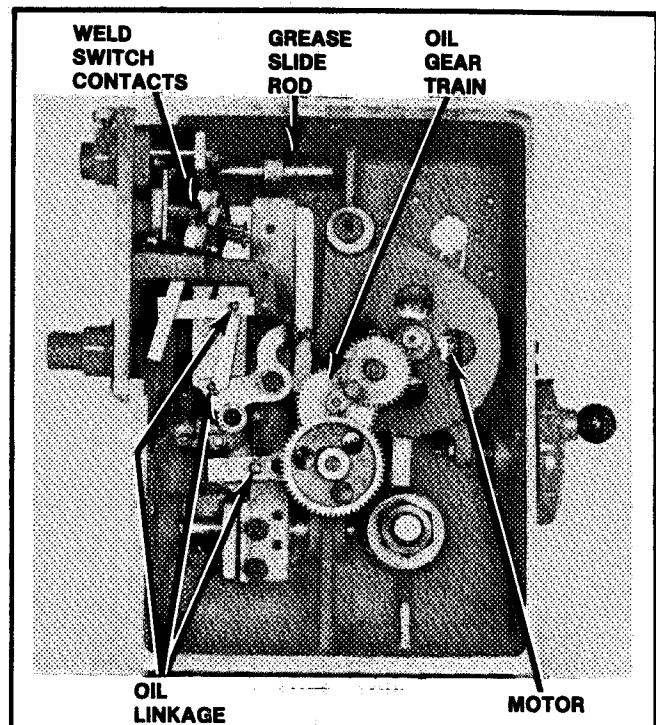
LUBRICATION & MAINTENANCE POINTS - FULL REAR VIEW WITH TRANSFORMER REMOVED.
